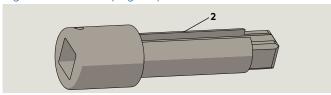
Bottom plug adapter installed in speed control drive shaft
